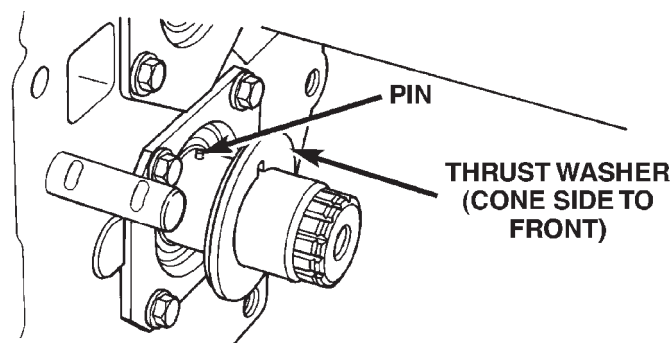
Installing Fifth Gear Thrust Washer Pin
